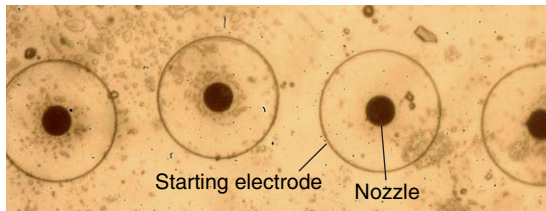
The nozzles. (Source: Lehrstuhl für Mikrotechnik und Medizingerätetechnik, Institut für Mechatronik, Technische Universität Munich.)
